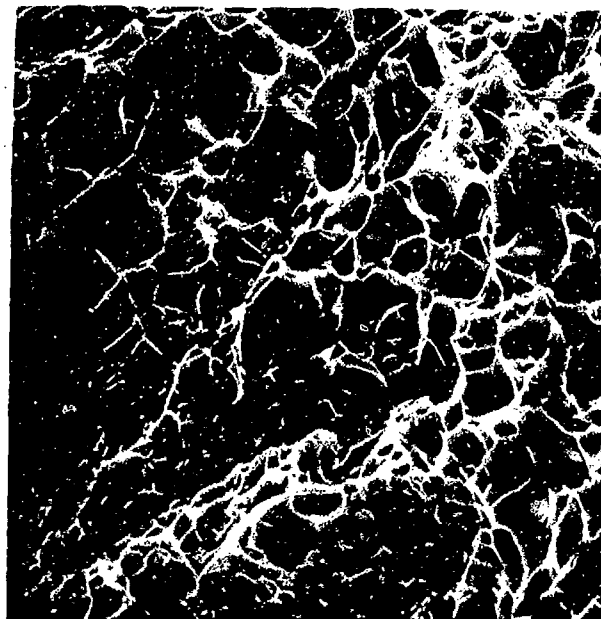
Region away from defects on AX-110 weldment fracture surface, 4000x.
